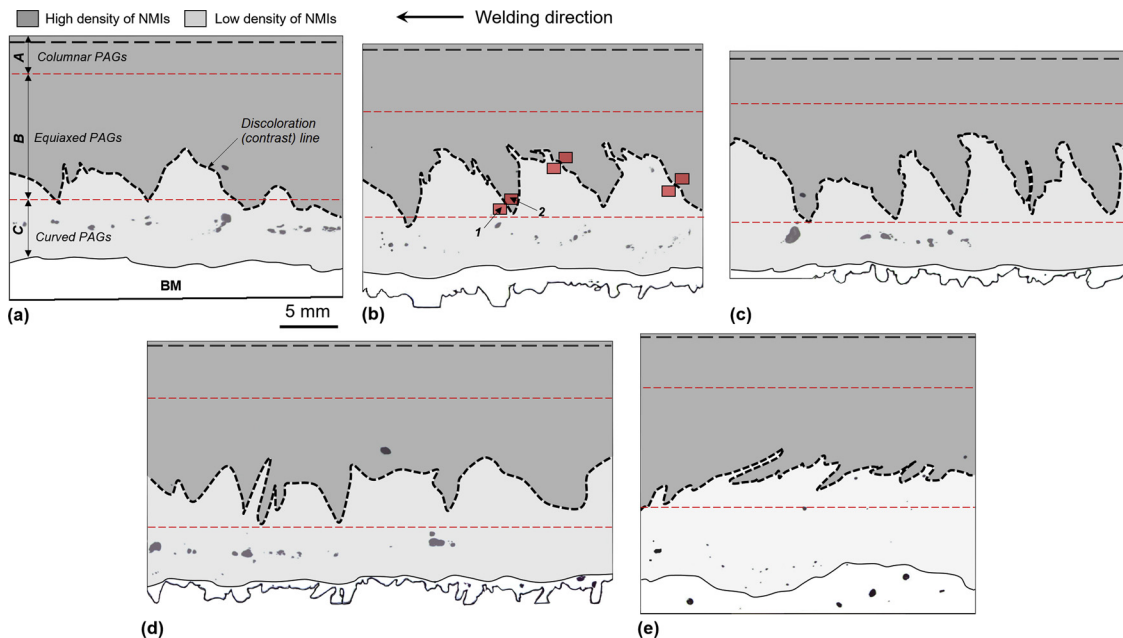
Physical filler metal distribution maps with rapid transition from high to low density of NMIs in longitudinal macrosections after etching based on discolored pattern in weld metal: (a) Weld No. 1; (b) Weld No. 2; (c) Weld No. 3; (d) Weld No. 4; and (e) Weld No. 5. A – zone depth of columnar PAGs, B – zone depth of equiaxed PAGs, C – zone depth of curved PAGs. Red squares represent the examined areas where 1 – inspection for low density of NMIs and 2 – area of inspection for high density of NMIs (For interpretation of the references to colour in this figure legend, the reader is referred to the web version of this article).
